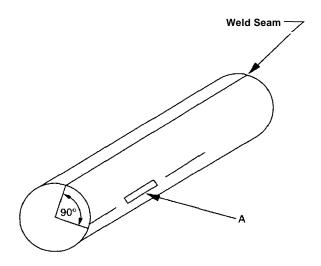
Figure Z-Orientation of Tensile Test Strip Specimen in Pipe
